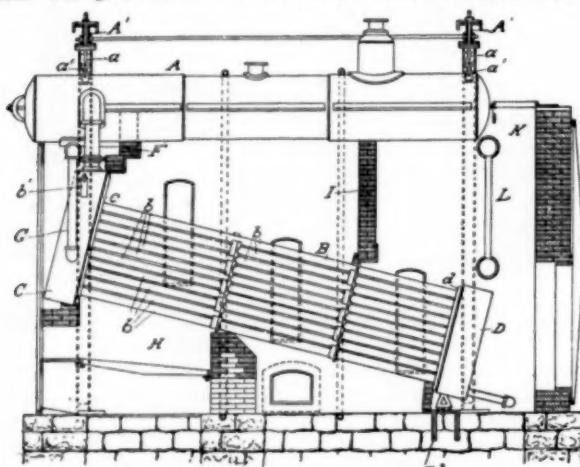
HAMMOND WATER-TUBE BOILER.
